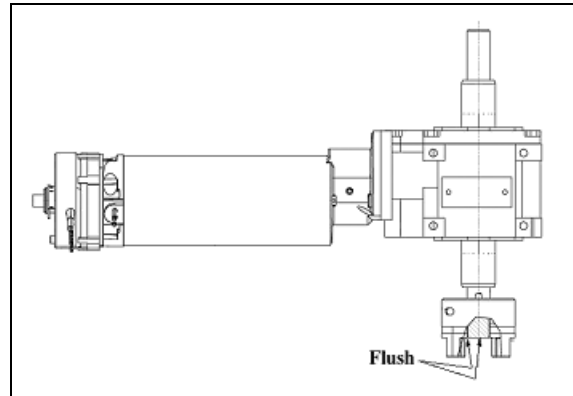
CLAMPING HUB POSITION ON GEARBOX SHAFT
